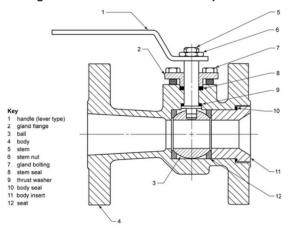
Typical Floating Ball Valve Components (One-piece Body/Unibody Illustrated)—
